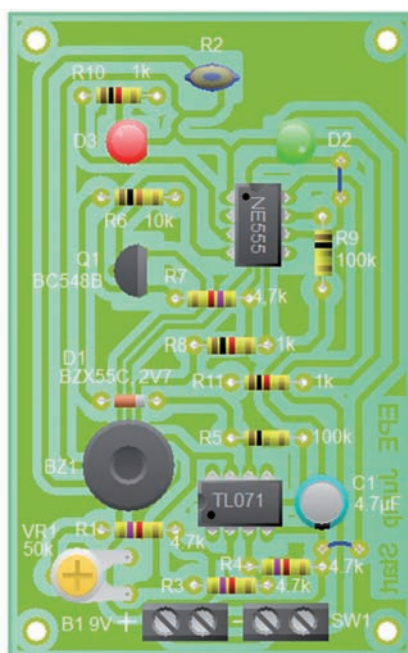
Frost Alarm printed circuit board component layout and copper track pattern. The final size of the prototype board is 90mm × 56mm
